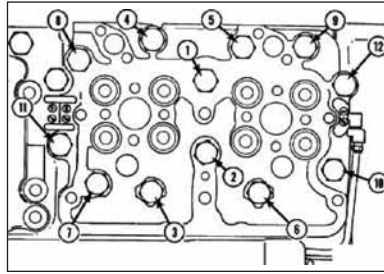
Cylinder head torque sequence for Cummins, 14.0L diesel engines.
